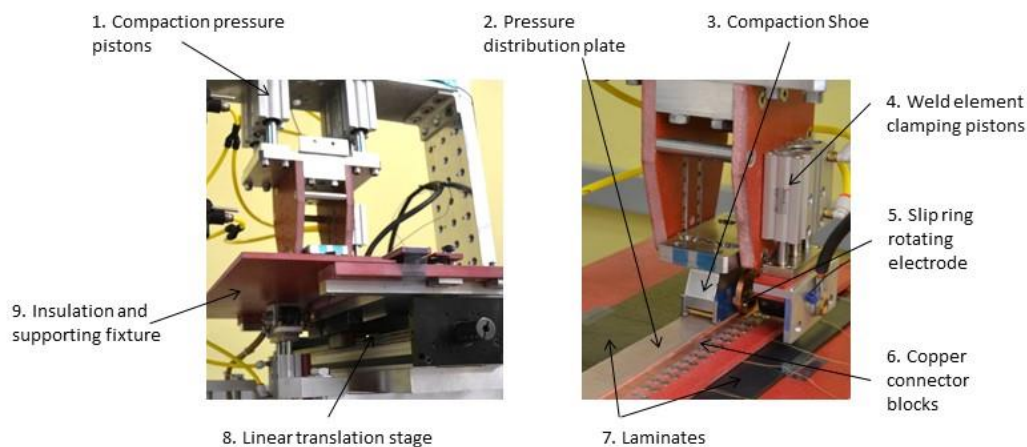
Single lap shear continuous resistance welding test bench setup.
